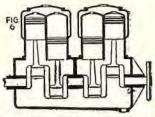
Four-cylinder engine with crankshaft set at 180°. Power stroke every half revolution, or stroke of piston.
